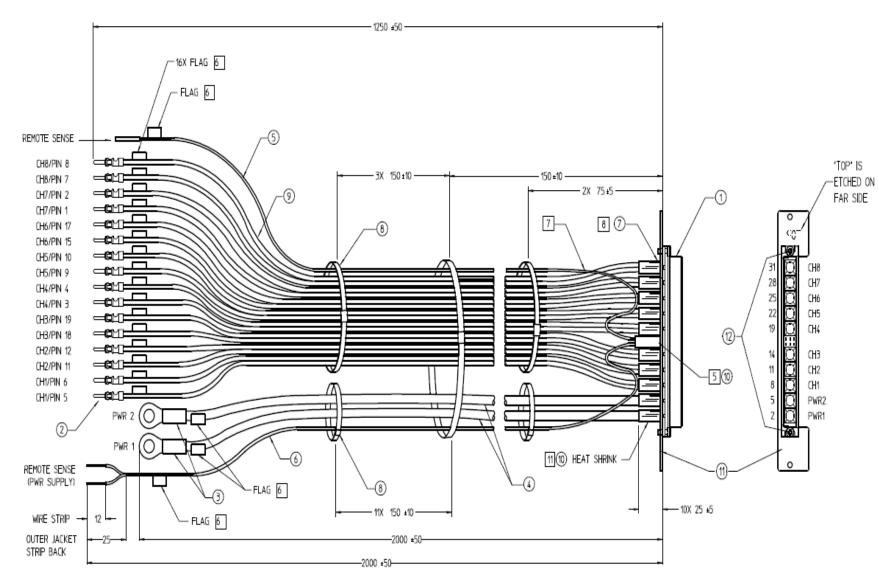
Cable for E6178B 8-CH Heavy Duty Load card to Express Connect
